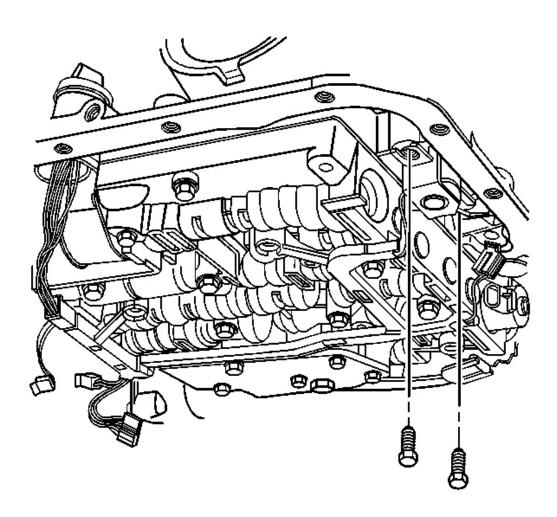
View Of TCC Solenoid Retaining Bolts Courtesy of GENERAL MOTORS CORP.
